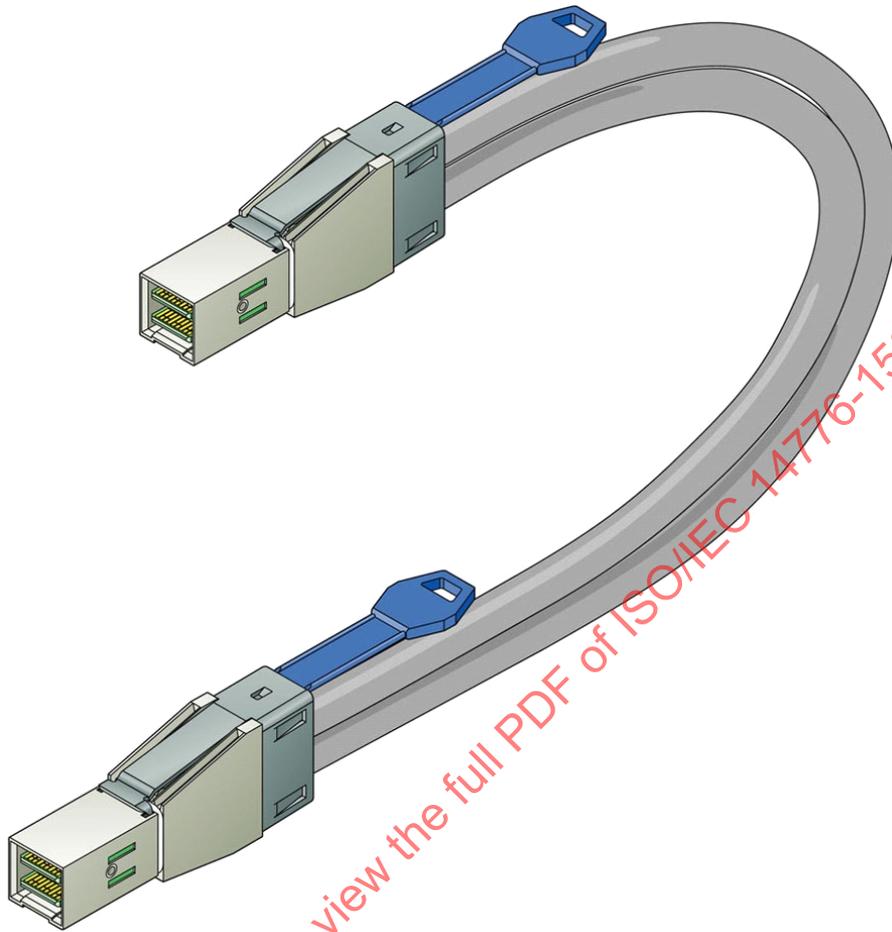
SAS external cable assembly with Mini SAS HD 4x cable plug connectors
